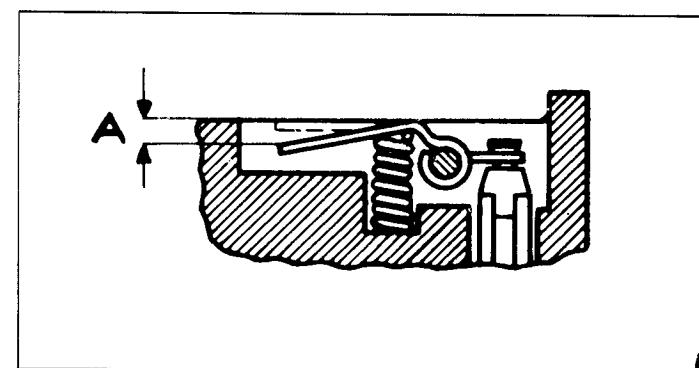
The lever should have a clearance of $A = 0-0.010"$ ($0-0.25$ mm). Bend lever to adjust.
